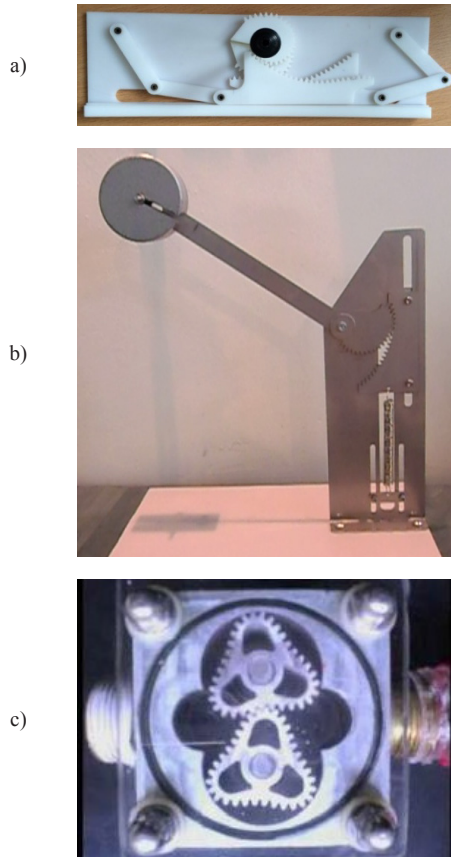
Application of noncircular gears: a) kinematic mockup of a special steering mechanism [3], b) Weight balancing mechanism [8], c) Water flow measure equipment [10].
